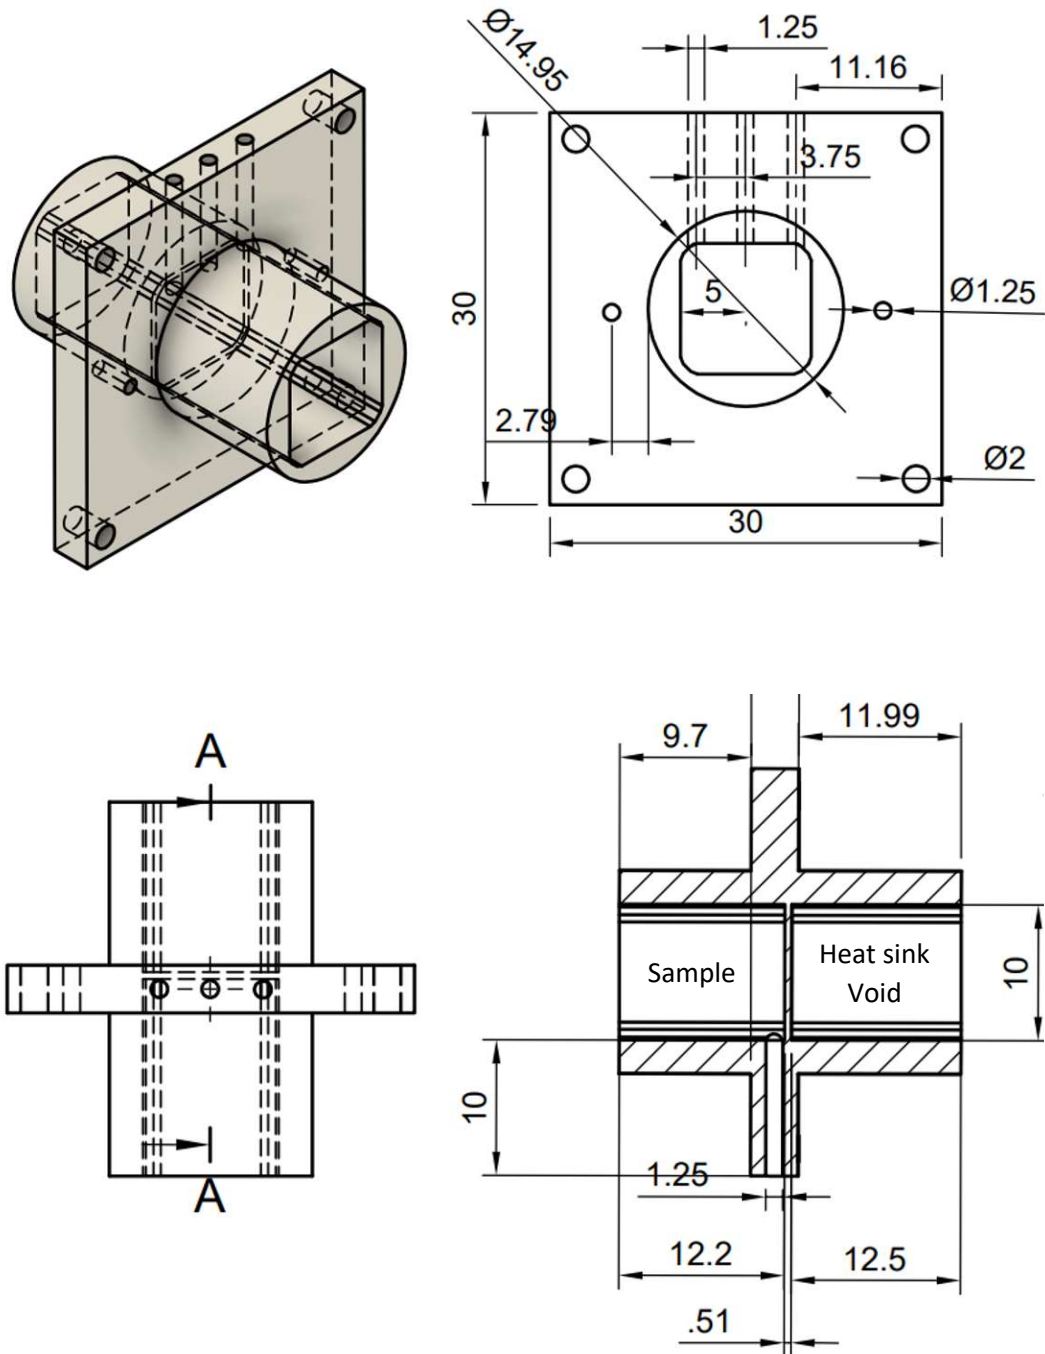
CAD drawing of the SP-RPA reaction holder. (Top) Cross sectional view of real time SP-RPA reaction holder showing sample access ports and internal dimensions. (Bottom) All units are in mm scale.
